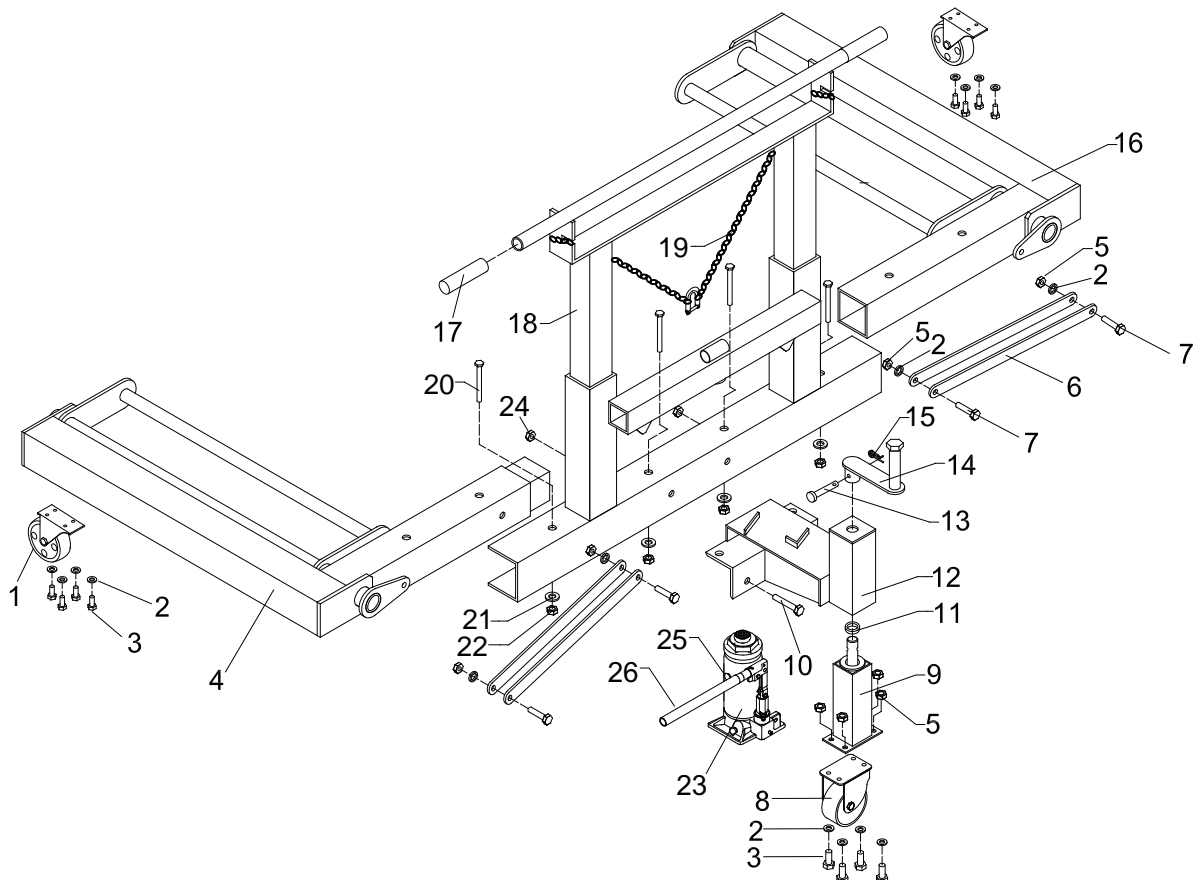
Replacement Parts Illustration for Model ATD-7227A
